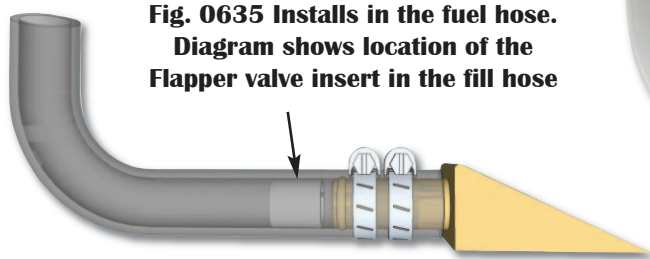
installs in the fuel hose. Diagram shows location of the Flapper valve insert in the fill hose
